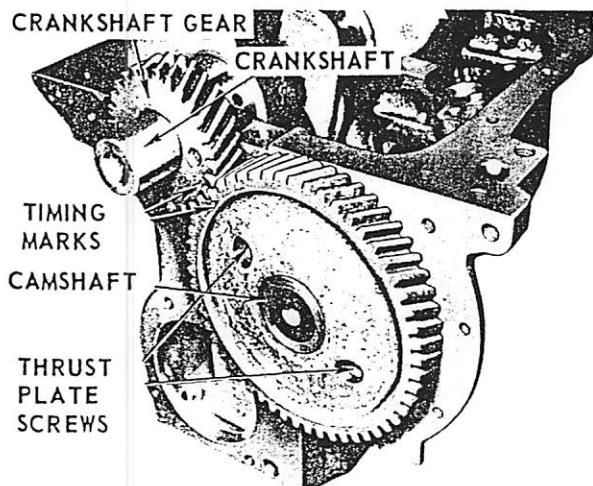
Timing gear drive for camshaft also requires alignment of timing marks. (Chevrolet)
